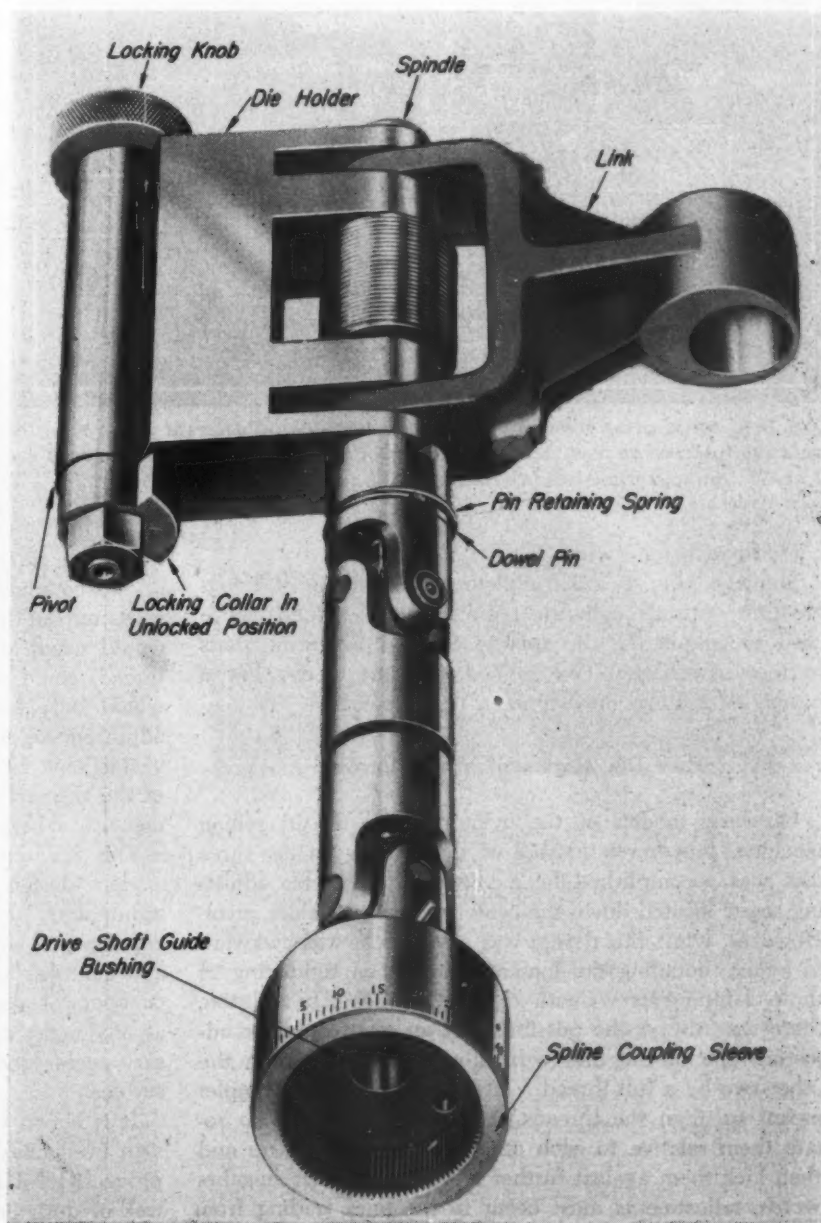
Right—Assembly shows how cylindrical die is mounted at apex of angle formed by die holder and link
